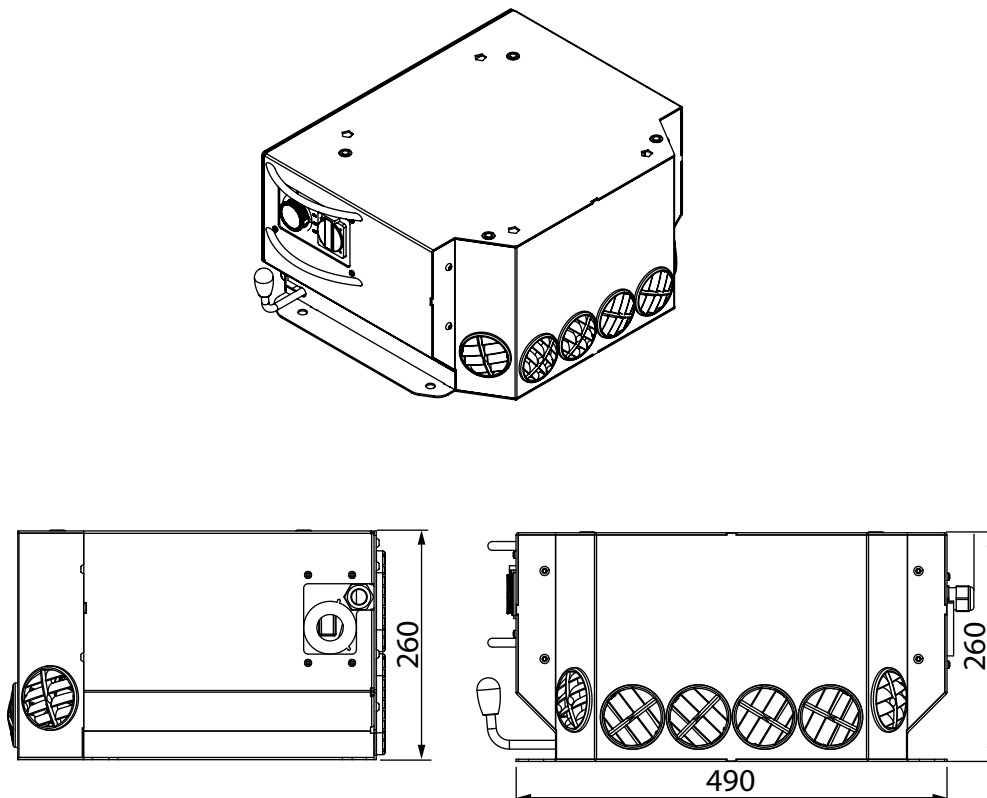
Dimension drawing, heater and ventilation substructure (dimensions in mm)
